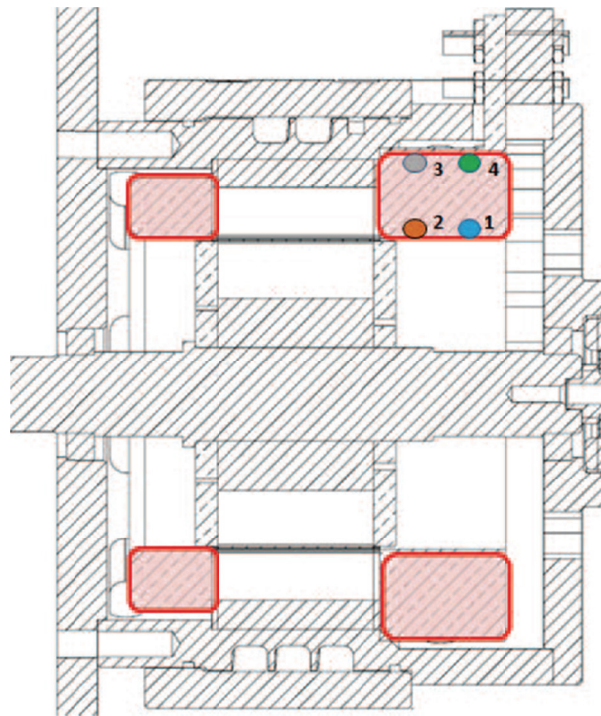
Position of the thermocouples on the stator end-winding.
